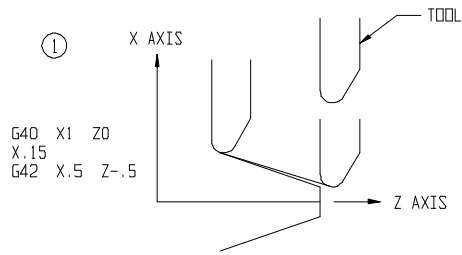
shows the cutter comp is not active until the G42 X.5 Z-.5 block is completed.
